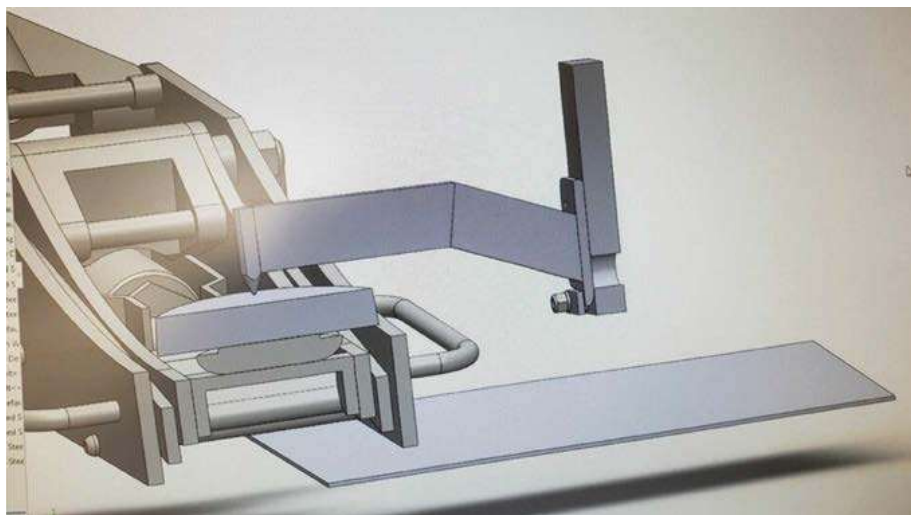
To remove the jack fitting, lower the jack and the fitting will slide off.
